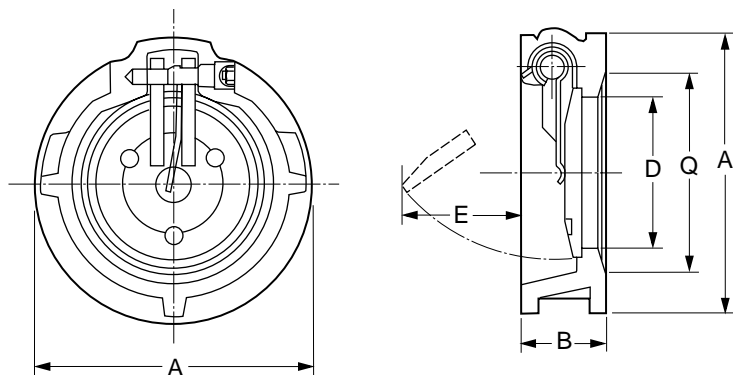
Valve Dimensions (Inches) Sizes 3-6 inch
